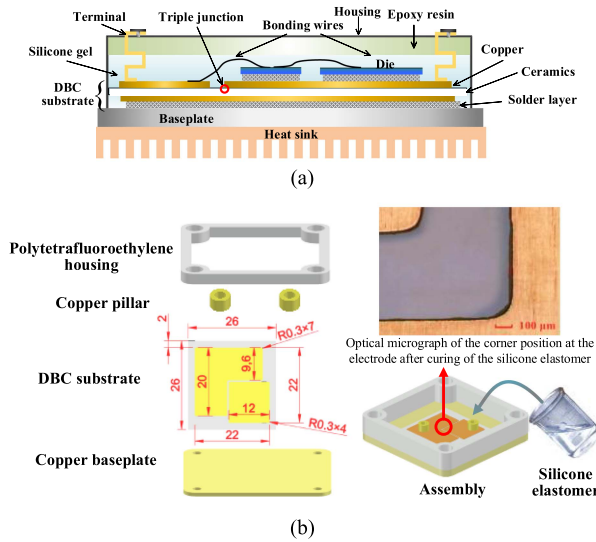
(a) Components of a typical power module. (b) Components and their assembly of the specimen.
